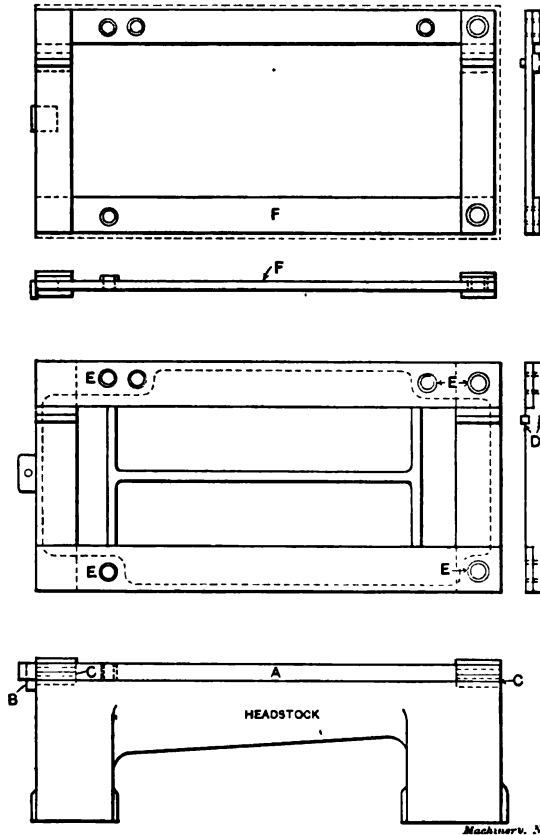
Application of a Wooden Jig for Drilling a Lathe Head-stock.
